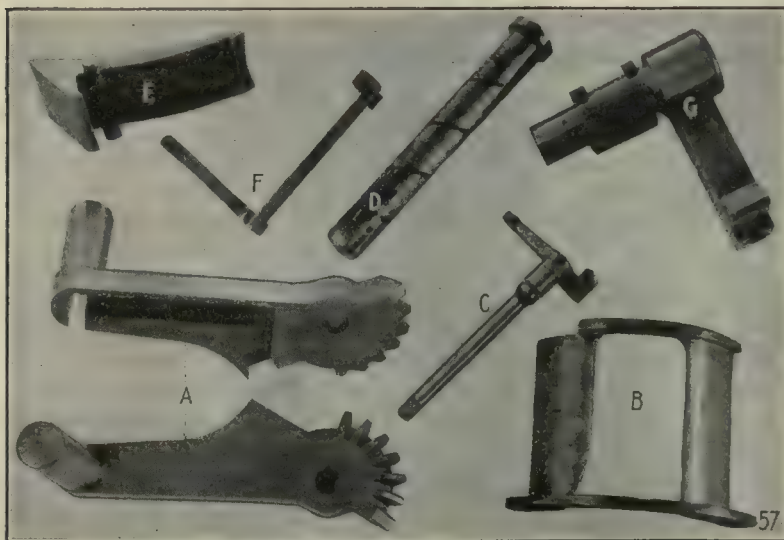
OPERATING LEVER, LOADING TRAY, FIRING LOCK CASE AND LARGER PARTS OF MECHANISM
